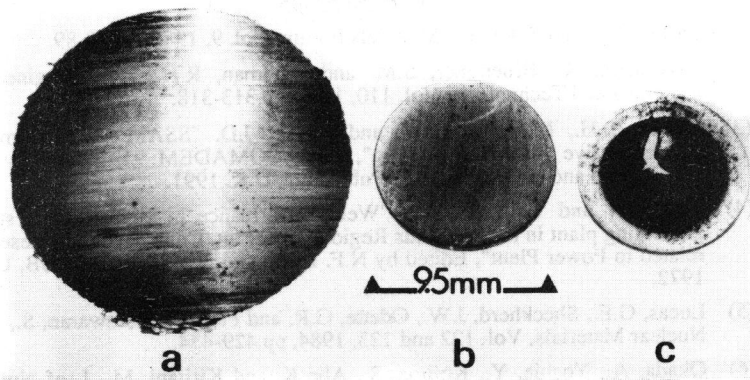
Typical button shaped sample removed from a component (a), with a disc testpiece shown before (b) and after testing (c)
